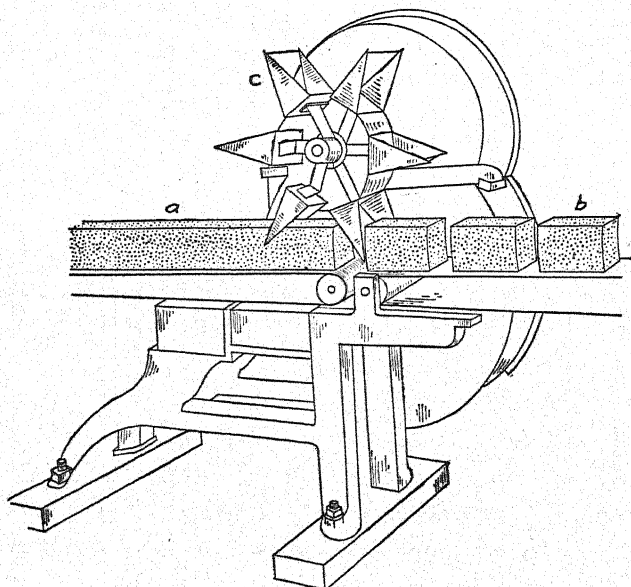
Automatic end brick-cutting machine. *a.* Column of clay. *b.* Bricks. *c.* Wire reel. (Courtesy of Chambers Brothers Company.)
